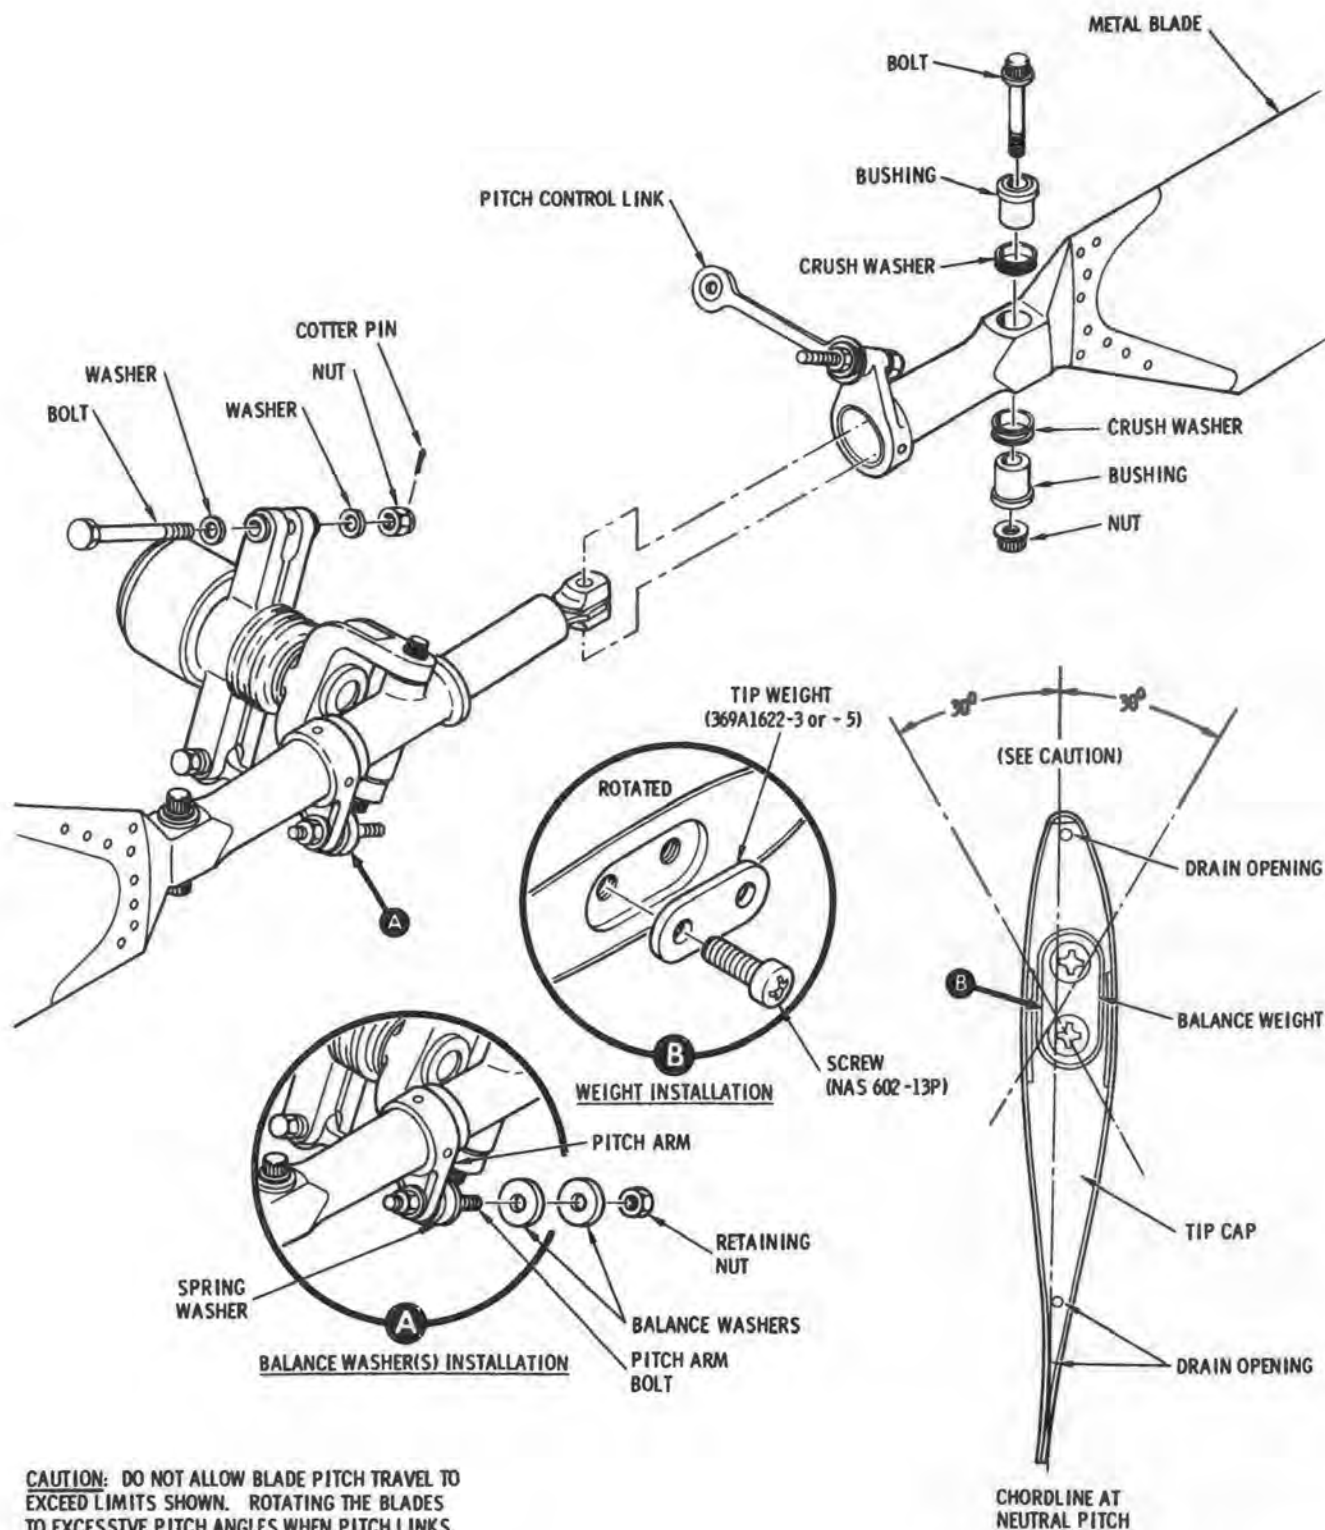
A. Metal Tail Rotor Blade - Replacement.
